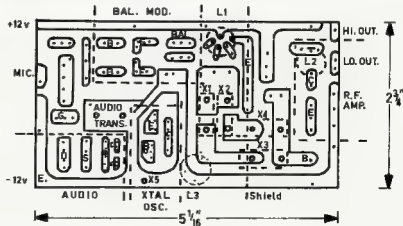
PRINTED CIRCUIT BOARD LAYOUT.
